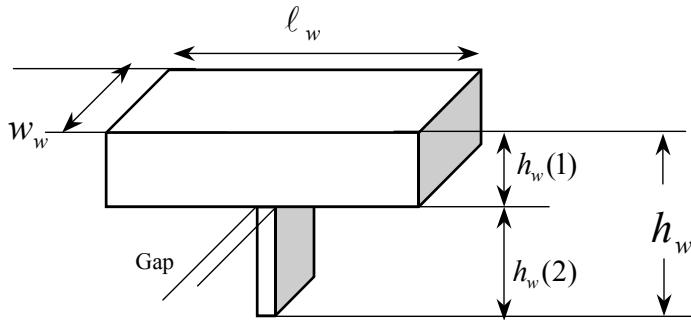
Magnified view of the weld used in FEM model for Example E2.
